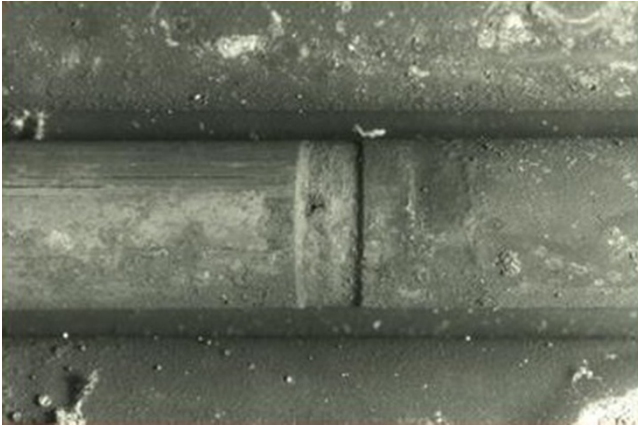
Tube-to-Support Fretting Wear: Note Hole Through Tube Wall (Pettigrew, 1976).
